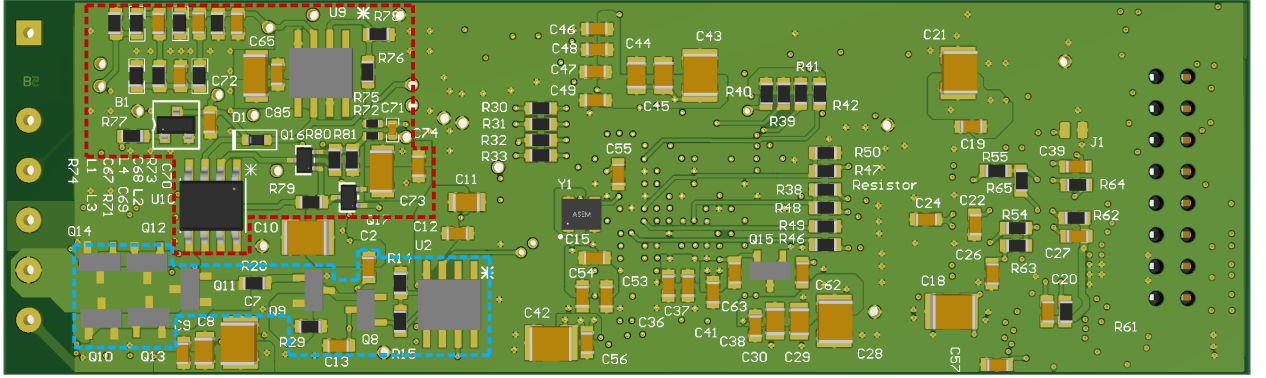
Bottom side of driver PCB with oscillation sensor (dark red) and turn-off driver (light blue).
